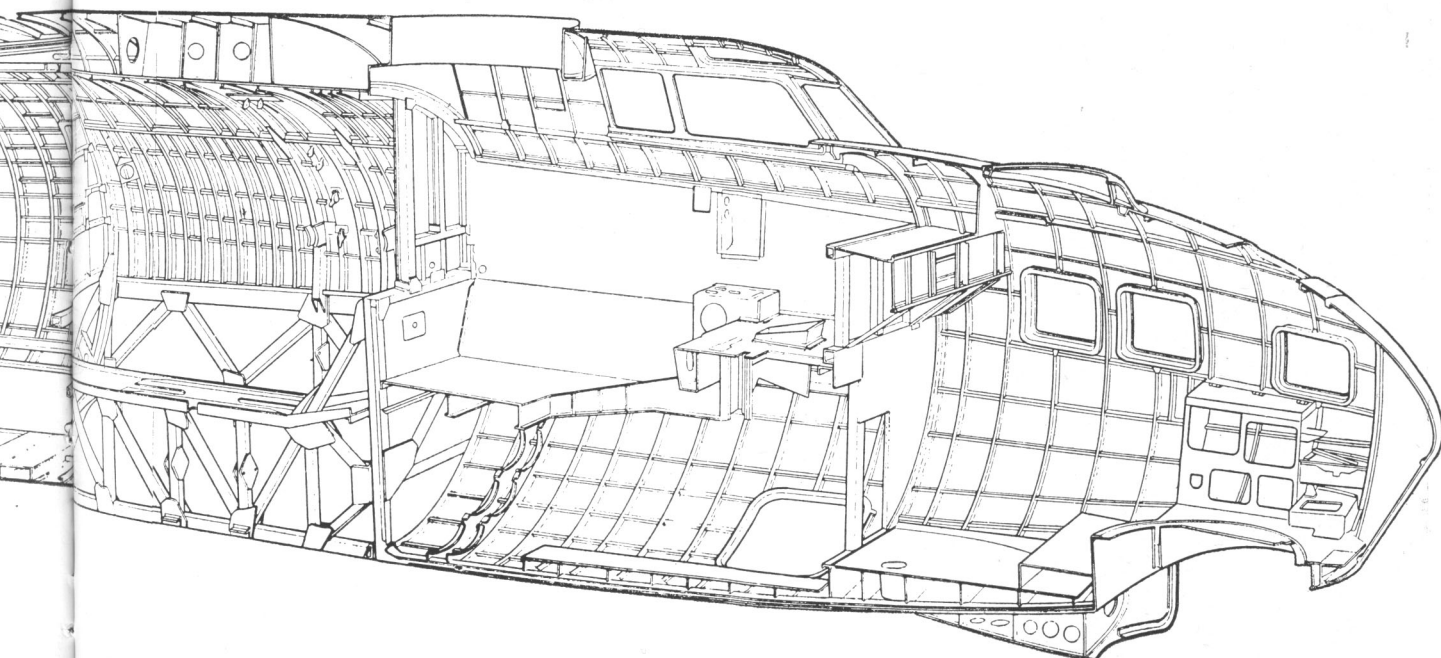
Typical fuselage structure showing bulkhead, longerons (on either side of the top opening), and circumferential and longitudinal stiffeners. The beams in the center foreground are floor supports, with a camera well between.
